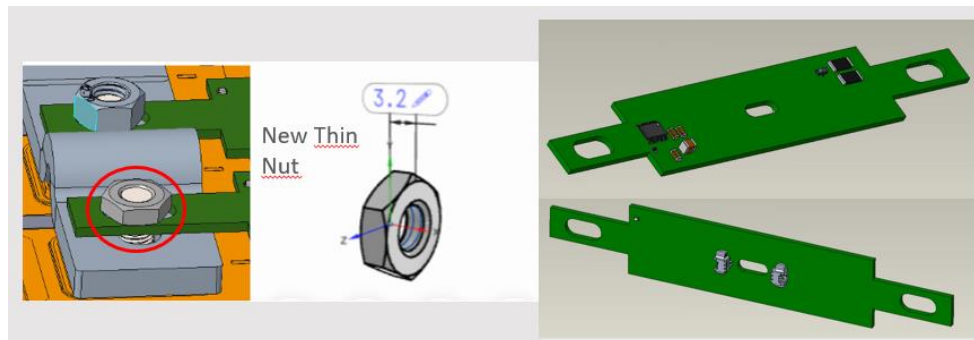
Assembly of CMBs with Thin Nuts (left) and CMB bottom view CMB top view (right).
